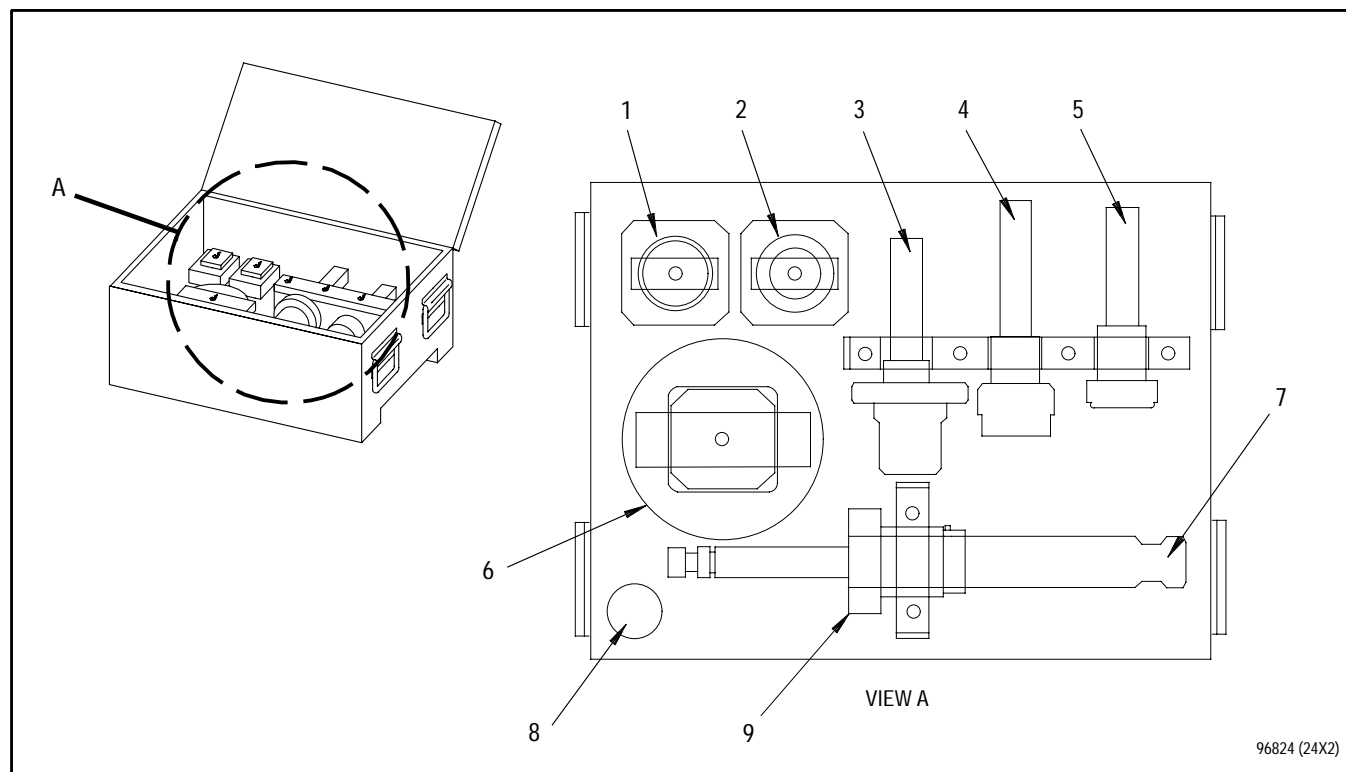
A. PWA 57906 Adapter, PWA 57807, or PWA 57650 Adapter Set
